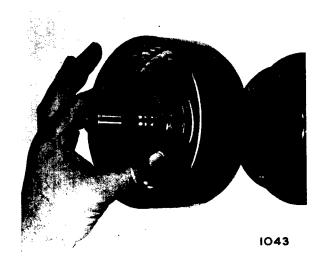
Fitting the front clutch cylinder thrust washer
